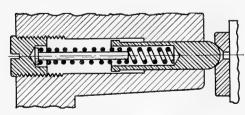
With a long spring and a fairly short plunger, a common flat-head wire nail can be used to support the spring against buckling. The spring also fits closely into the plunger hole to gain support, and the plunger is flanged at its upper end to prevent its slipping through the hole.
